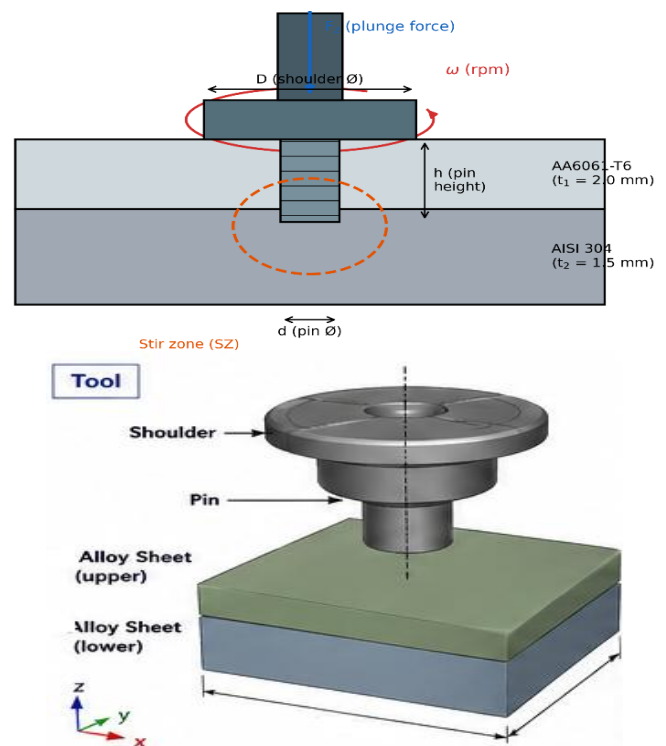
Schematic of the friction stir spot welding (FSSW) tool and dissimilar AA6061-T6/AISI 304 stack showing the governing geometry ratios D/d and h/t
